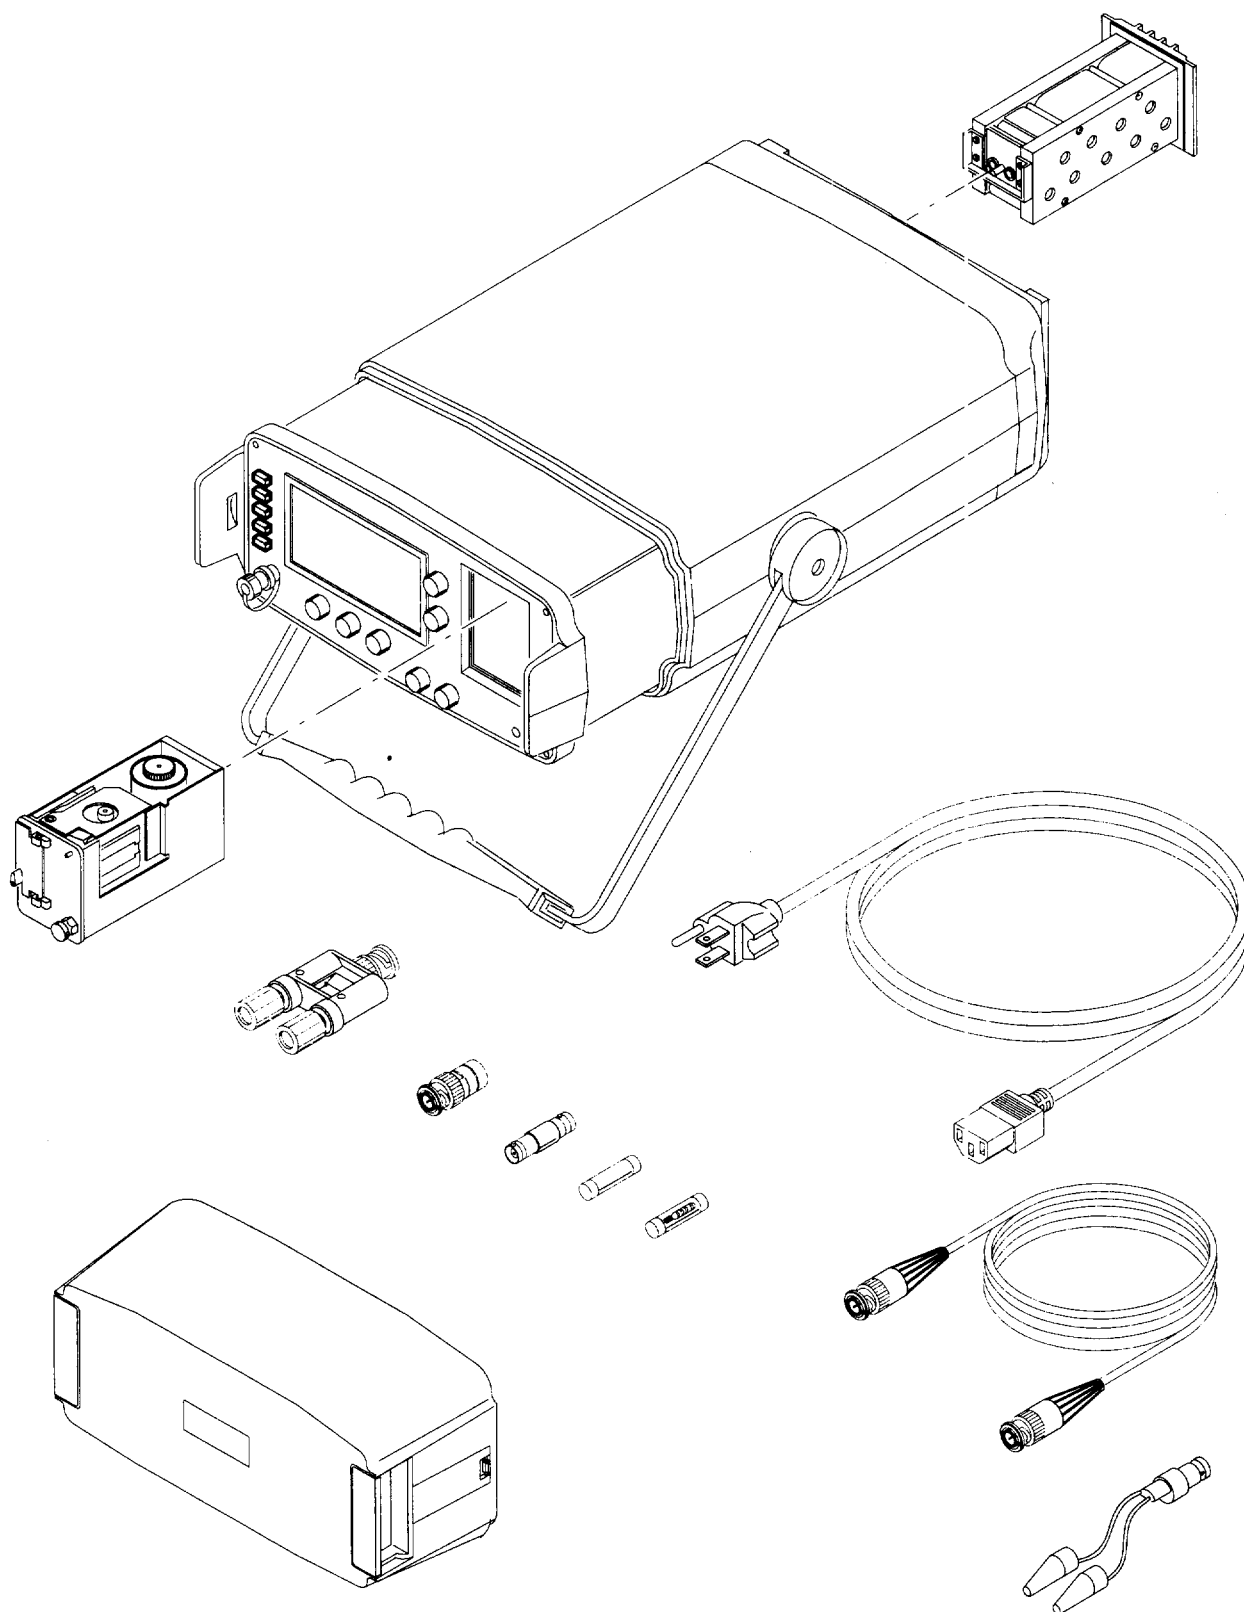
Test Set, Electrical Cable TS-4165/G
